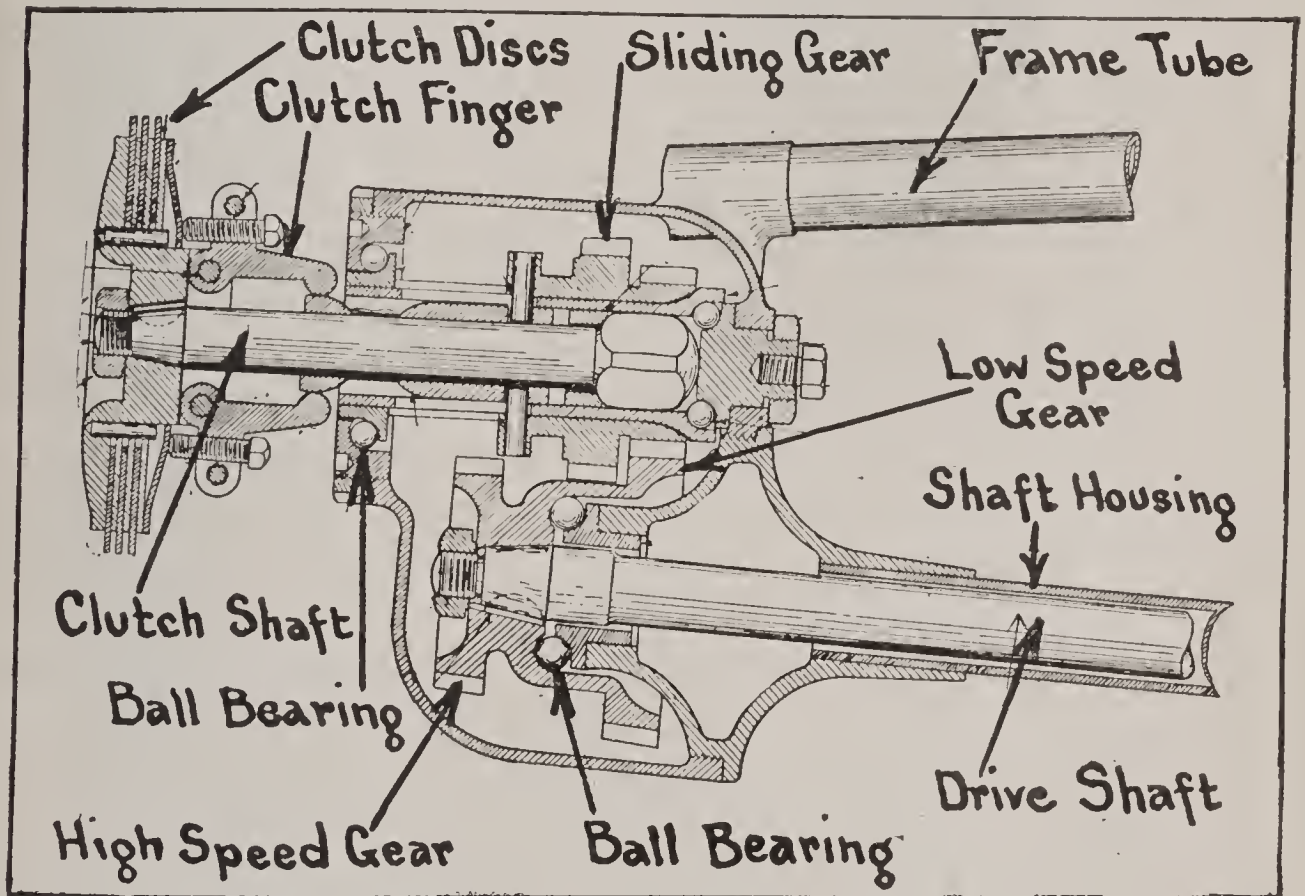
Plan View of Pierce Two Speed Sliding Gearset.
